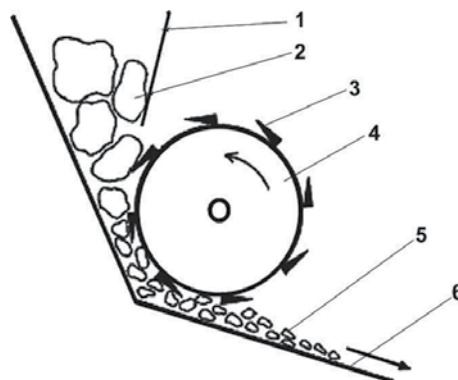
Ice-crushing machine. 1, infeed hopper; 2, large ice chunks; 3, blade; 4, rotating drum; 5, crushed ice; 6, discharge chute.
